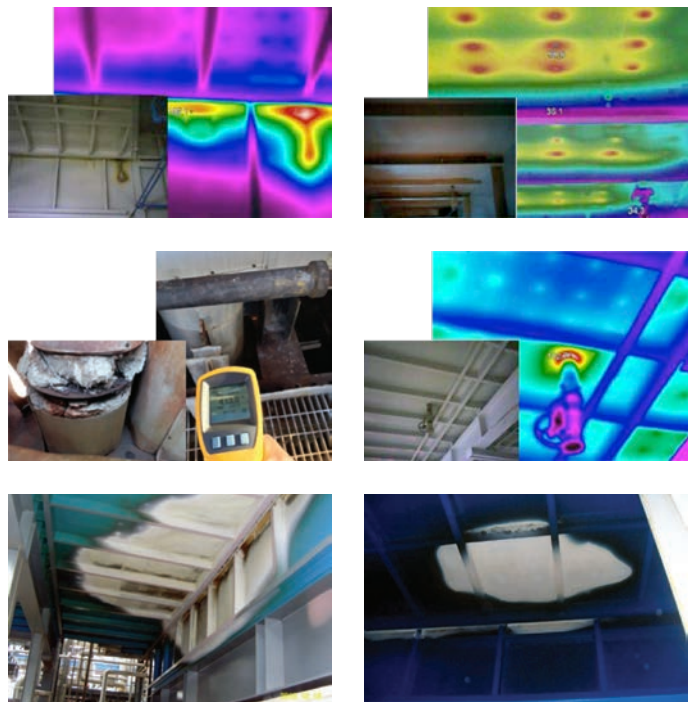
Casing Burn by Hot Gas Leakage from Damaged Liner Plate
